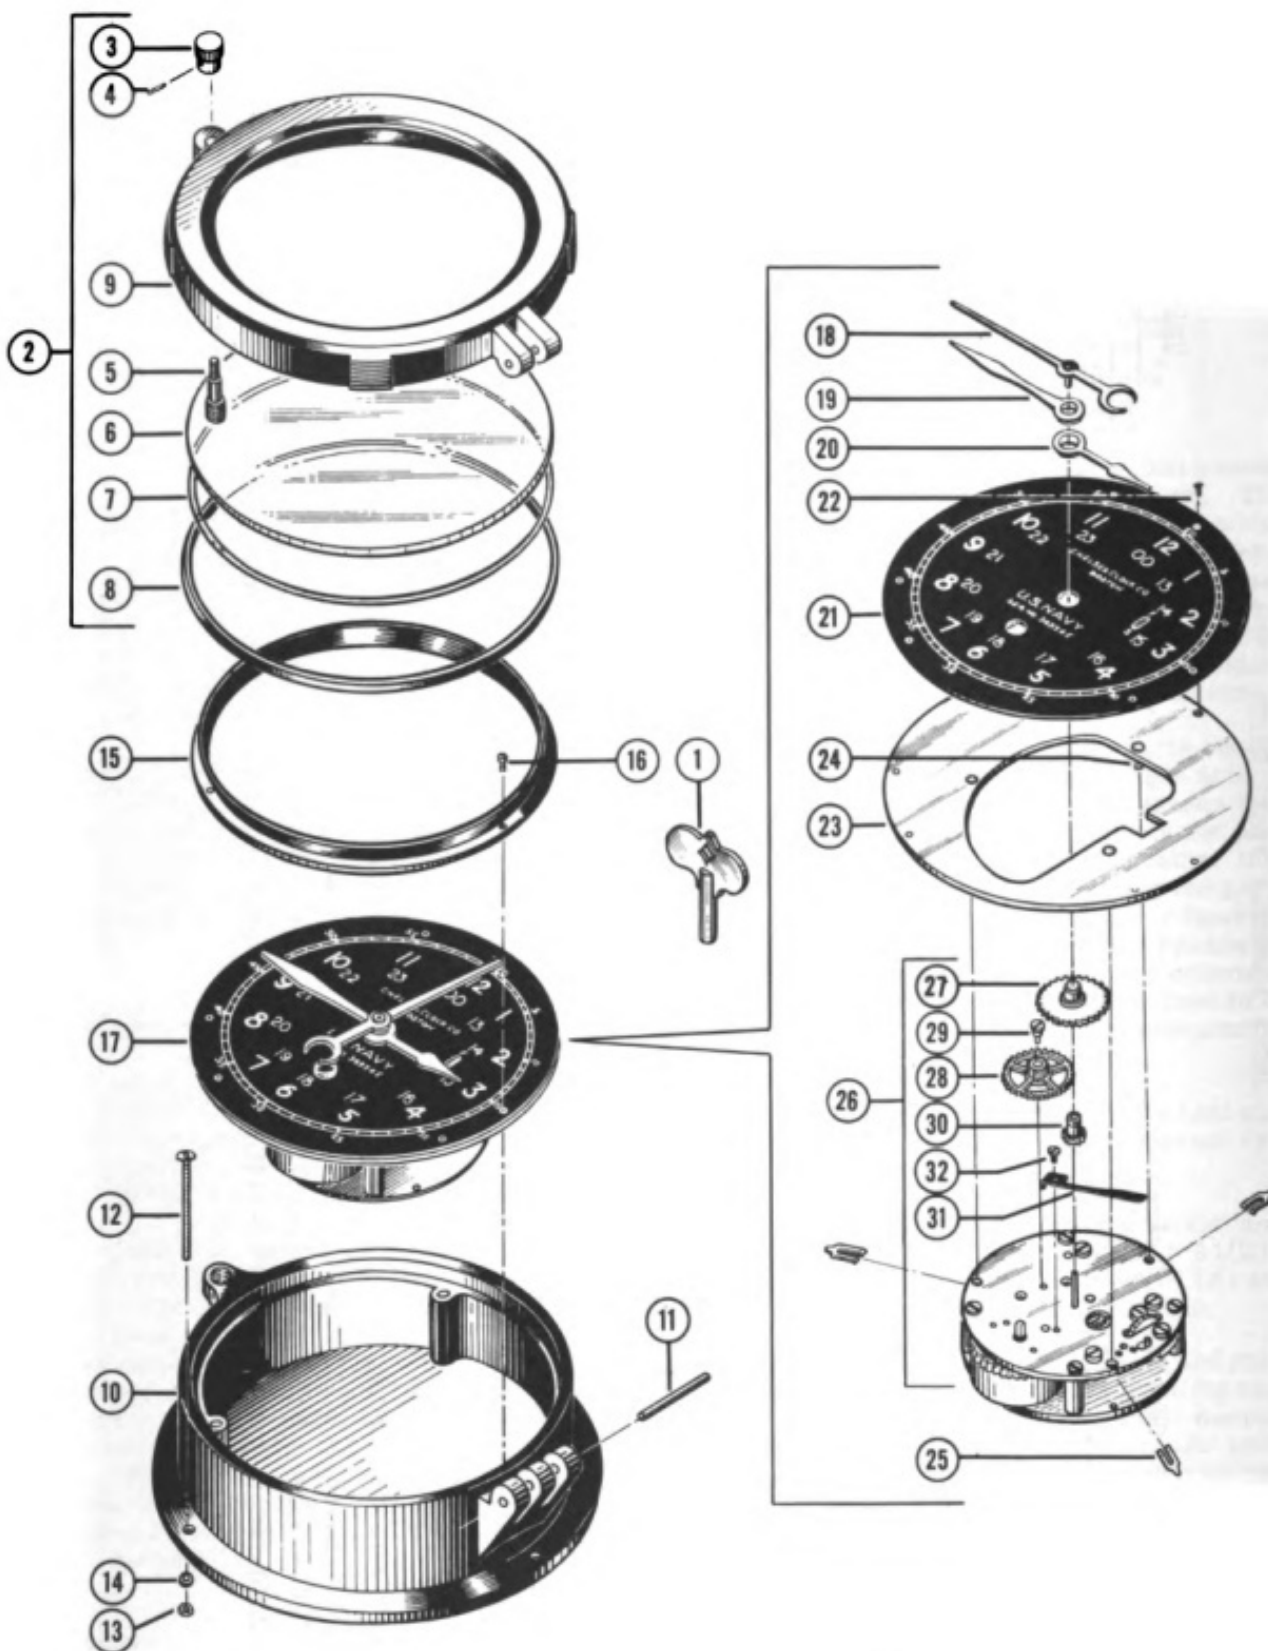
Chelsea No. 12E Mechanical Clocks, Main Assembly—Exploded View
